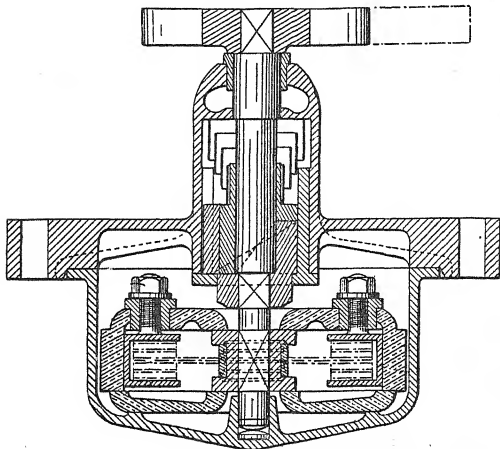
Elevation of switch and switch-box in the Kingsland modified system.
